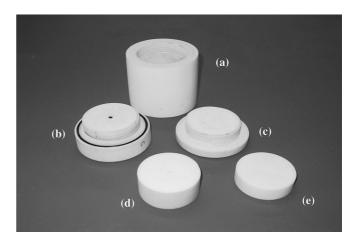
The PTFE mould used in this work. (a) The central cylindrical tubular mould; (b) and (c) the end caps; (d) and (e) discs for height adjustment of blocks.
